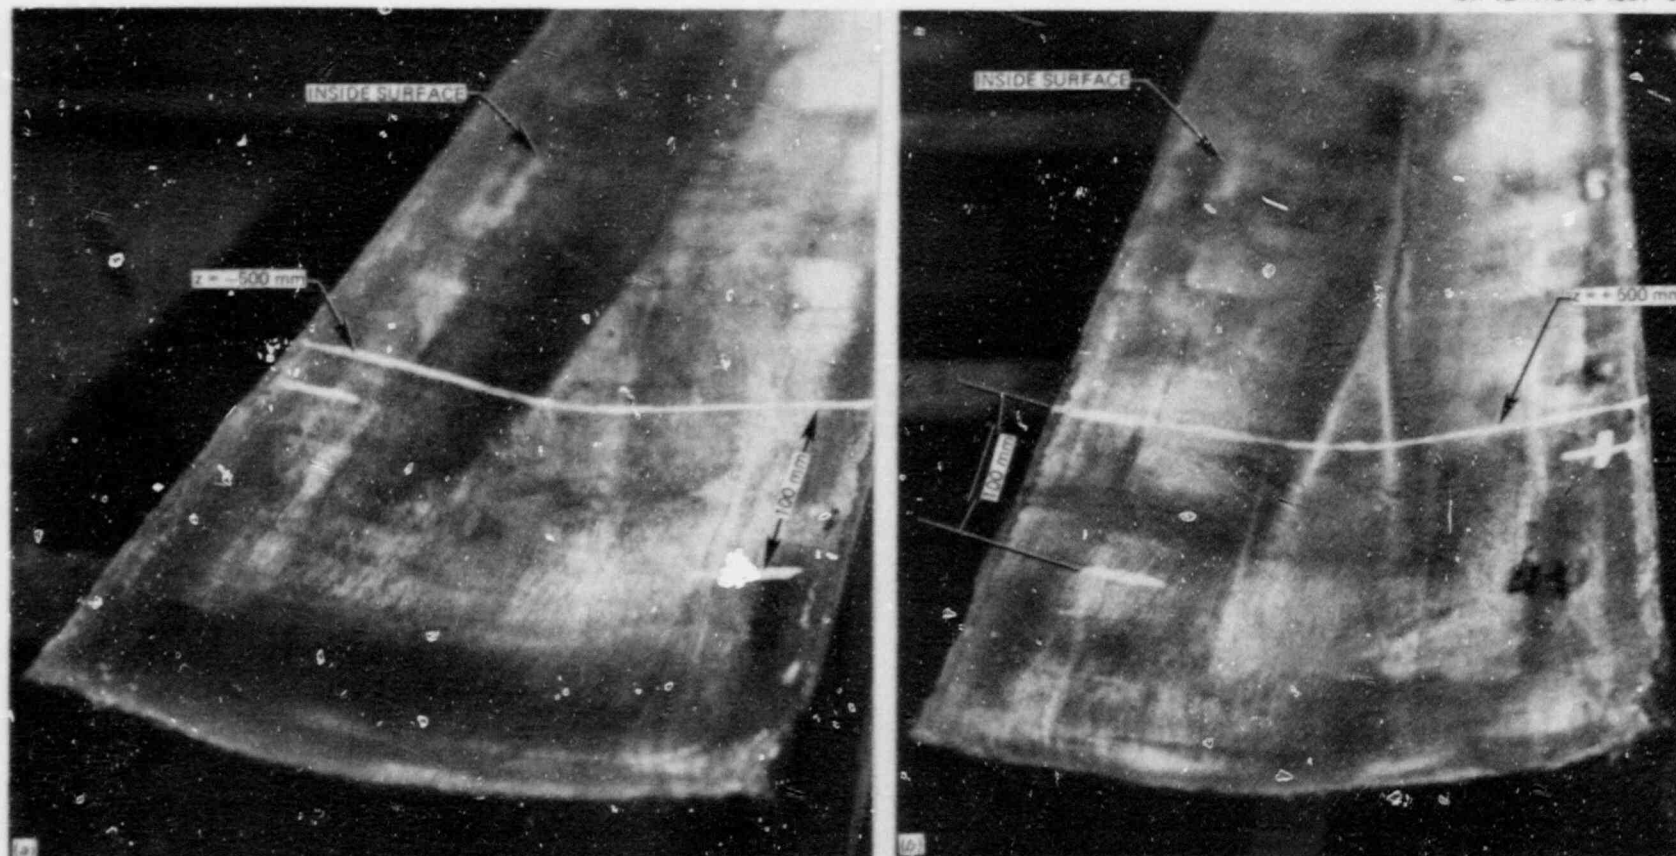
Photographs of inside surface of the block containing PTSE-2 flaw. These views of the (a) lower and (b) upper ends of the block show the residual plastic deformation at the ends of the flaw.
